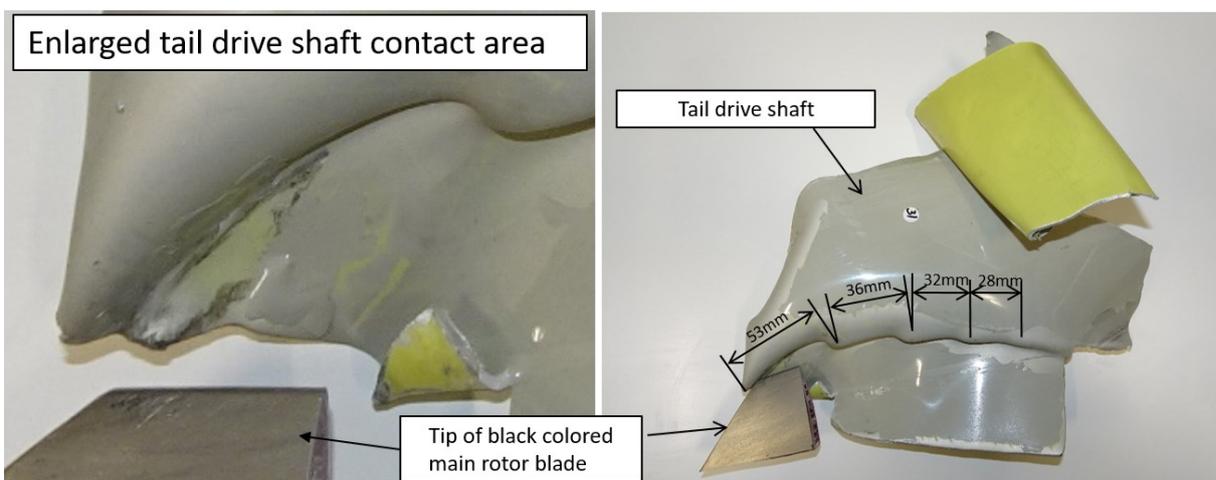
Contact marks between black main rotor blade tip and tail drive shaft
